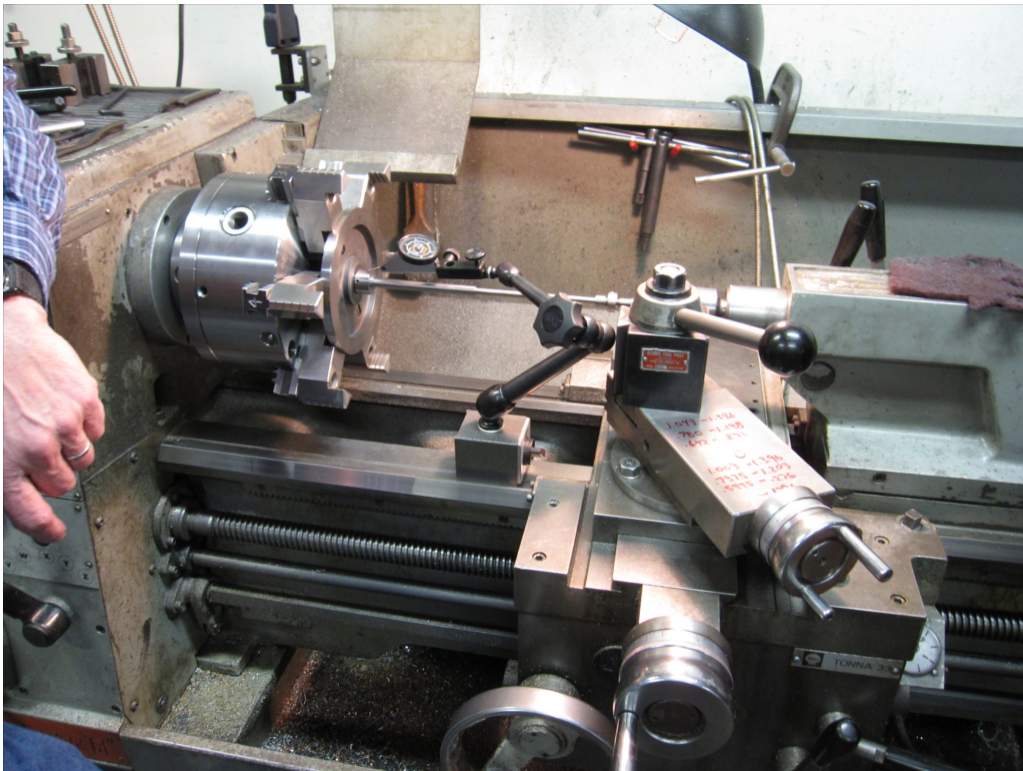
Measuring the run out on the different parts of the flywheel-shaft assembly.
